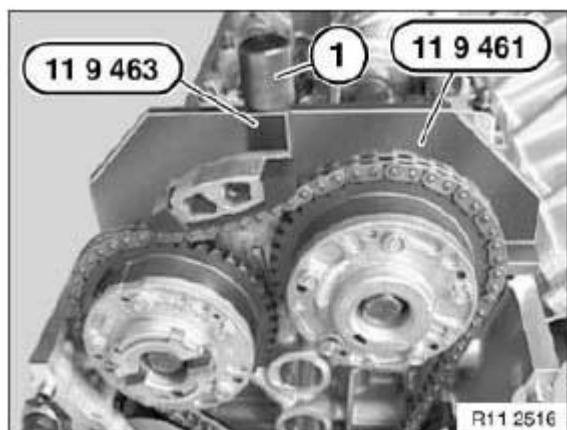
Identifying Special Tool (11 9 463) And (11 9 461)
